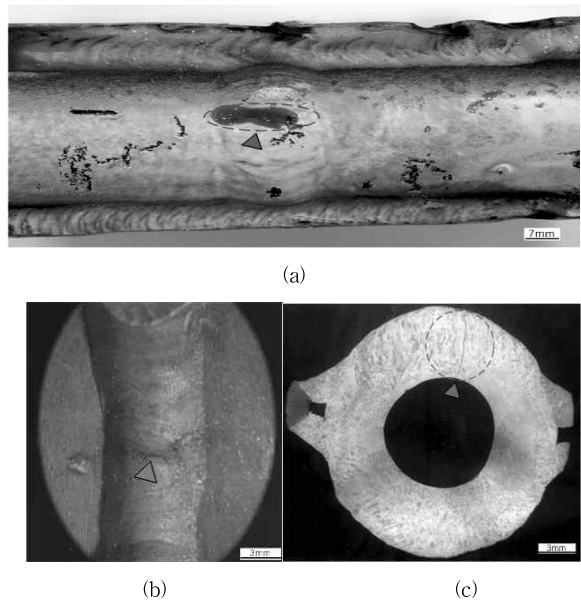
Macroscopic weld failure metal showing (a) transverse & crater crack, (b) root crack and (c) crack propagation direction
